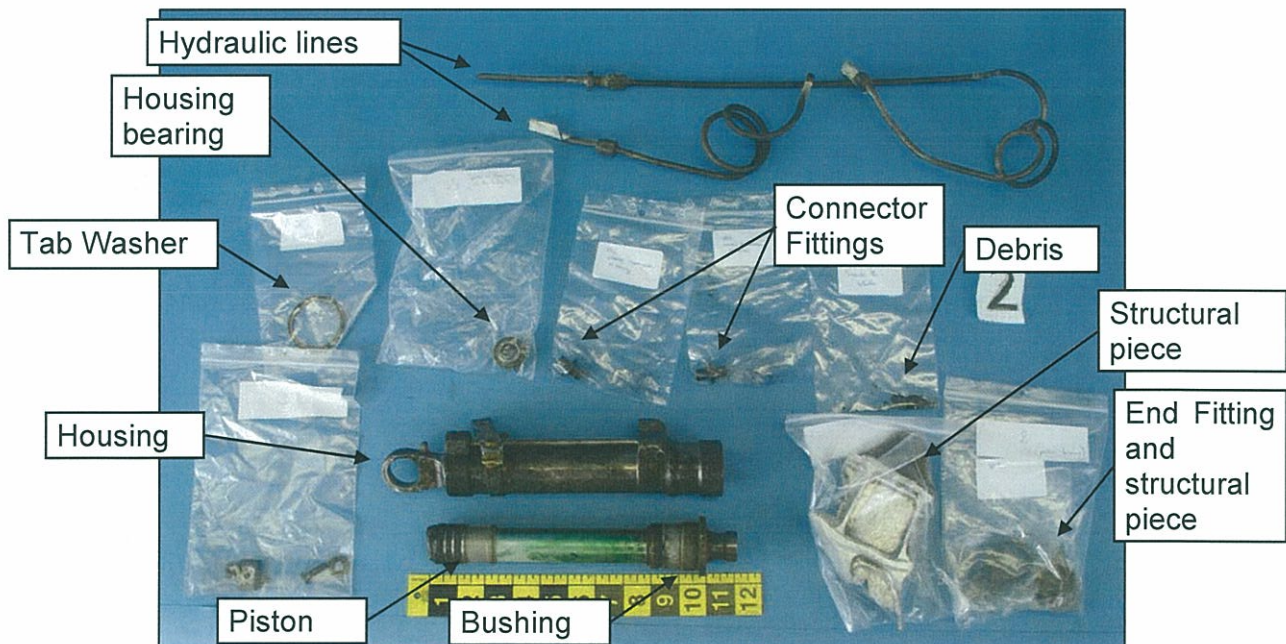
Overall view of the right outboard flap actuator and hydraulic lines.
